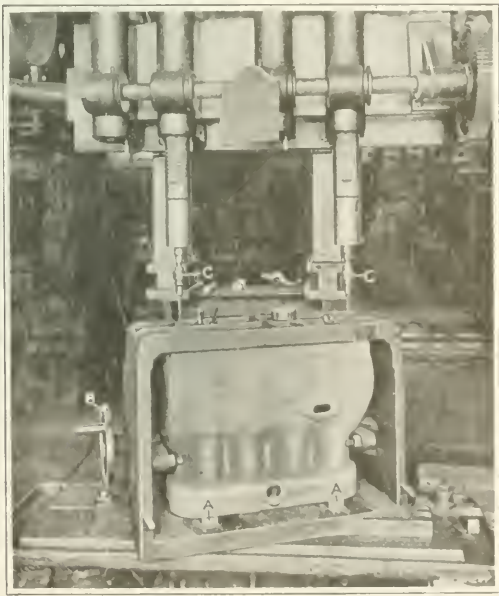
Two-spindle Foote-Burt Drill Press equipped with Quick-change Chucks and Tools for drilling and reaming Master Locating Holes in Base of Cylinder Blocks
